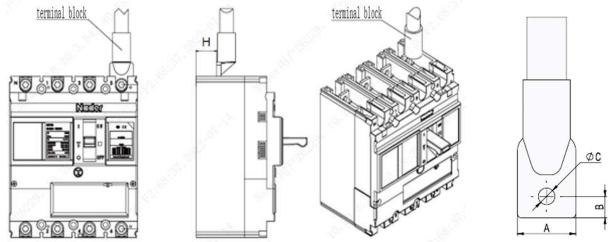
Connection of Copper Bar in Front of Board or Copper Cable with Terminal Block Table 23 Connection size of copper bar in front of board or copper cable with wiring terminal
